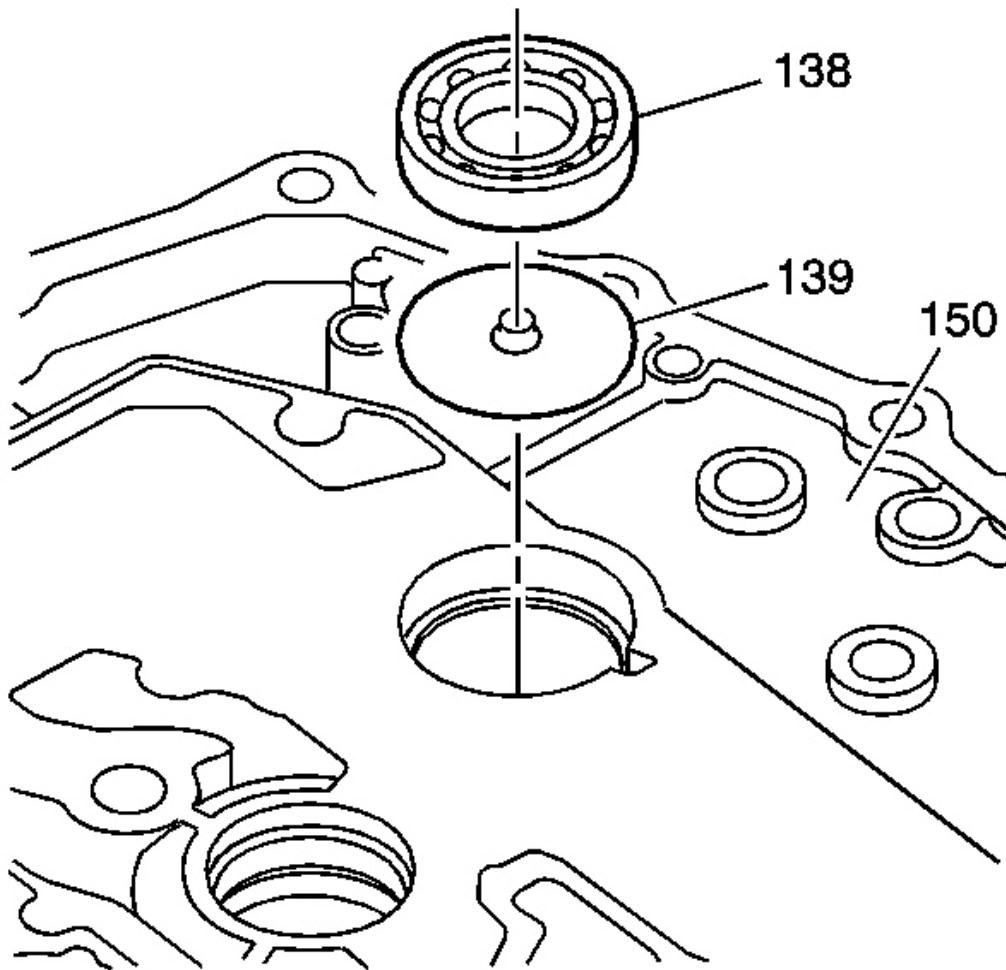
3rd Clutch Shaft Lube Feed Plate & 3rd Clutch Shaft Front Bearing
